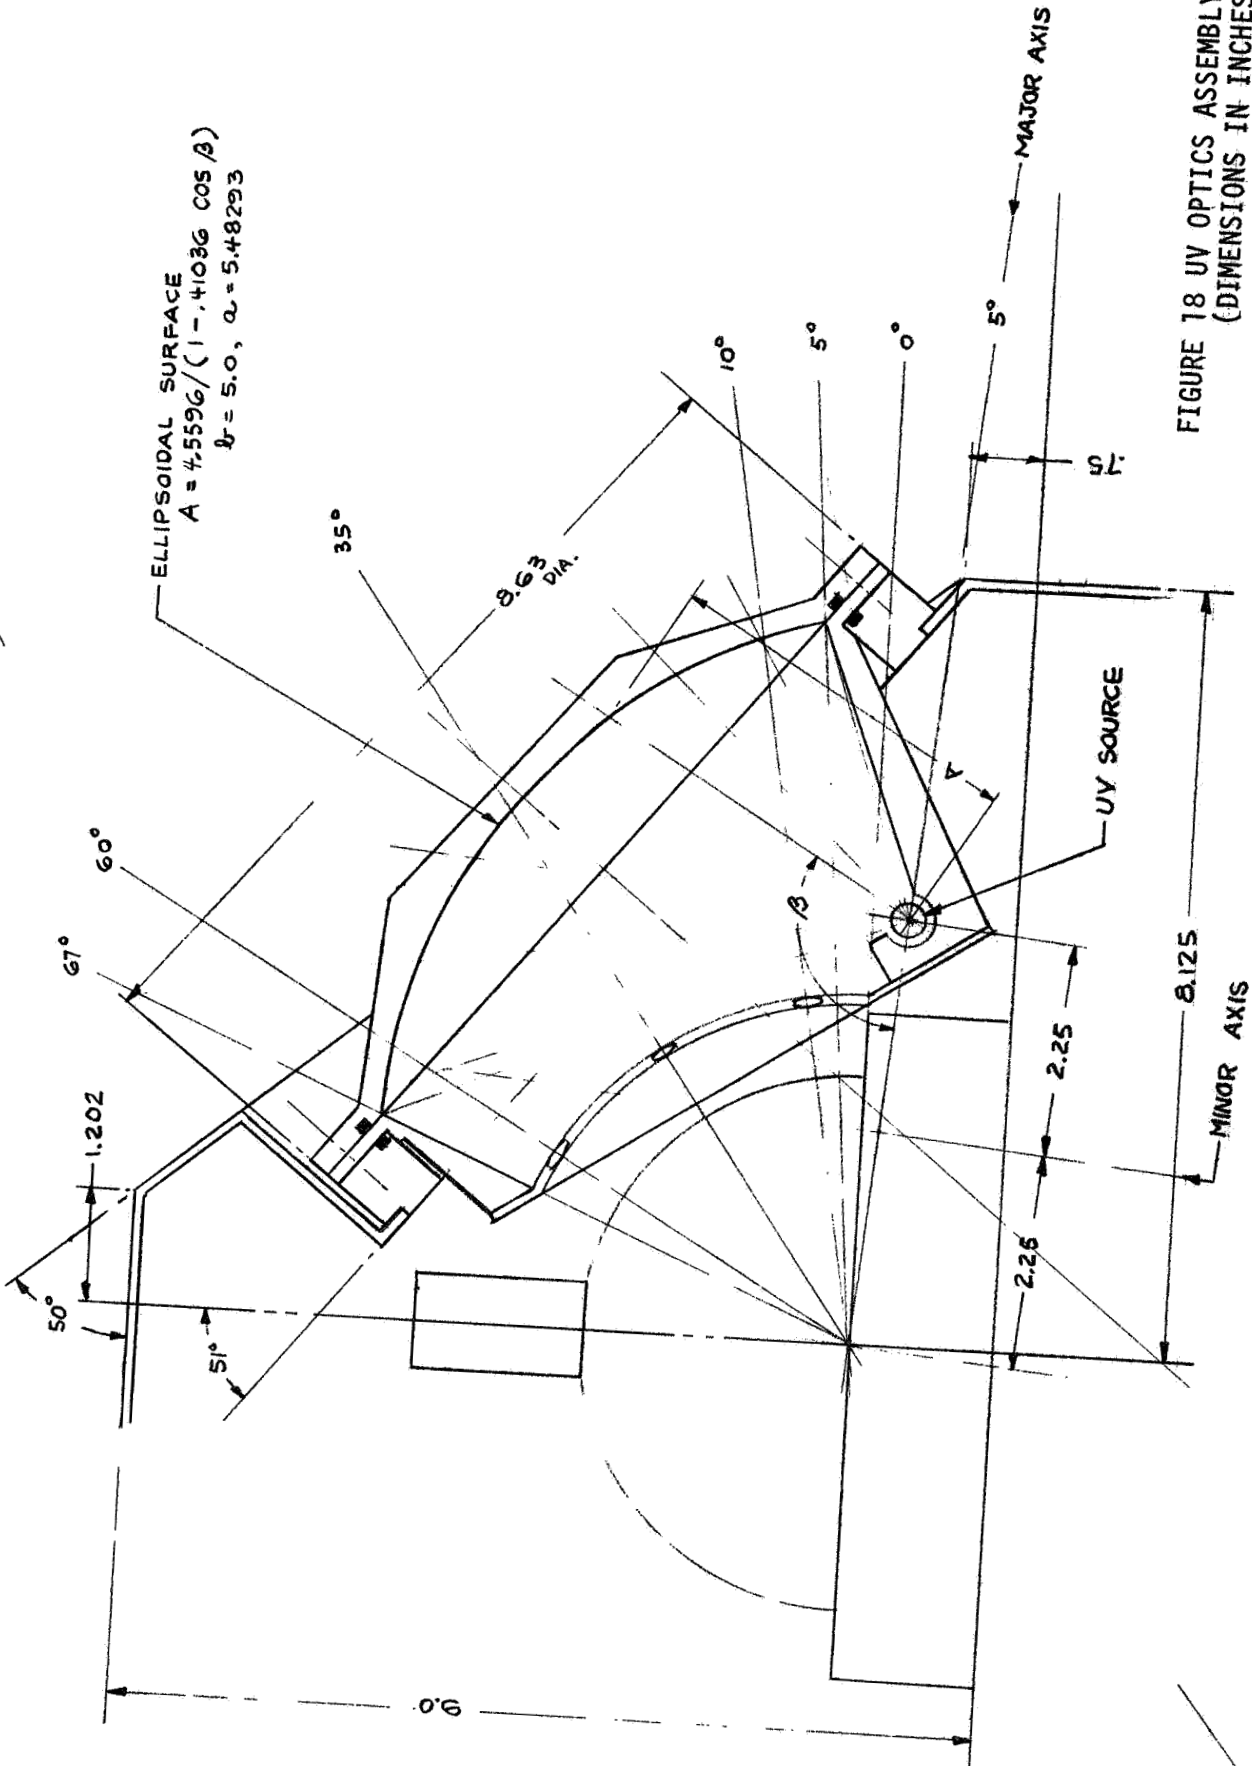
UV OPTICS ASSEMBLY LAYOUT
